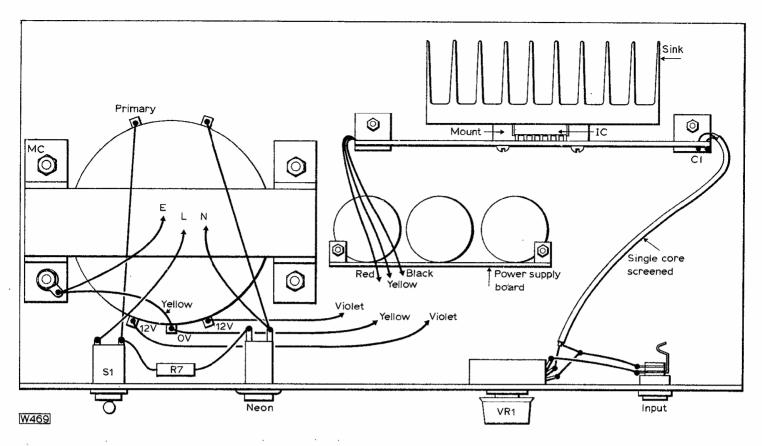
Detailed wiring and assembly of the amplifier. Particular attention should be paid to the mains wiring; the live tags on \$1 and the panel neon are depicted unhealthily near the 12V secondary of the mains transformer. The latter should be shown slightly further back from the front panel.
